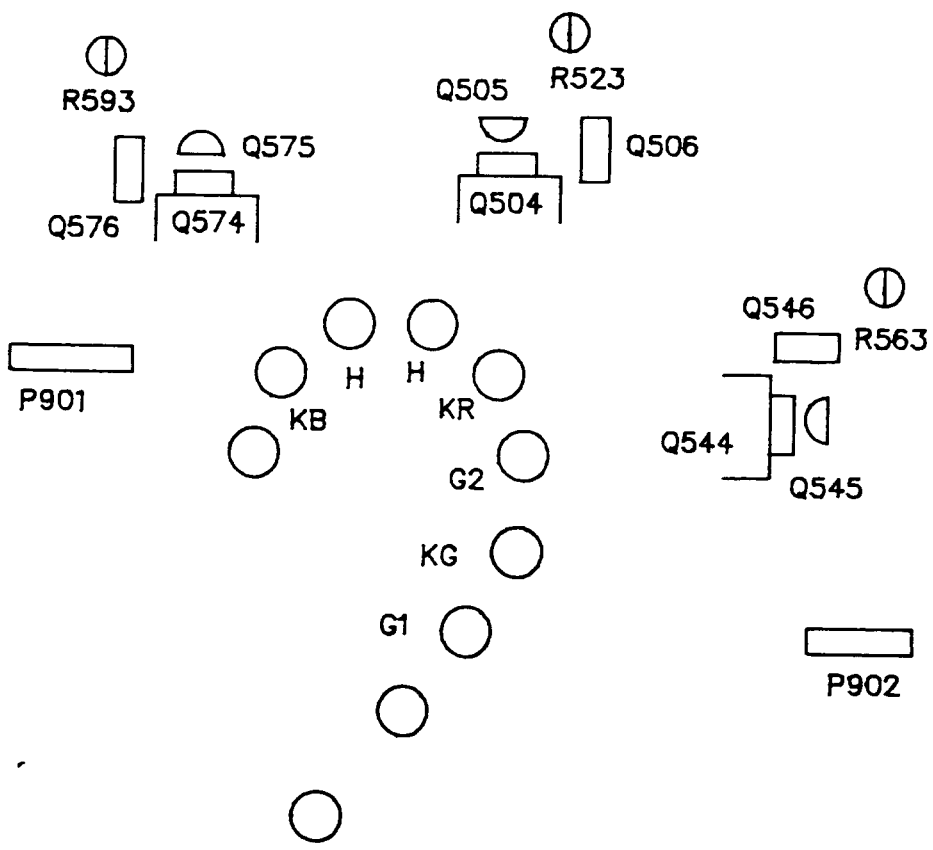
PCB-CRT DRIVE adjustment and test location
